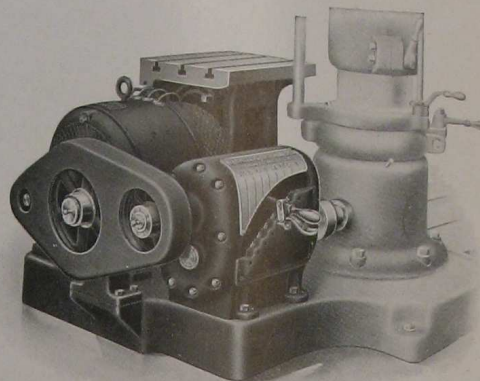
Constant Speed Motor Drive thru Speed Box.
